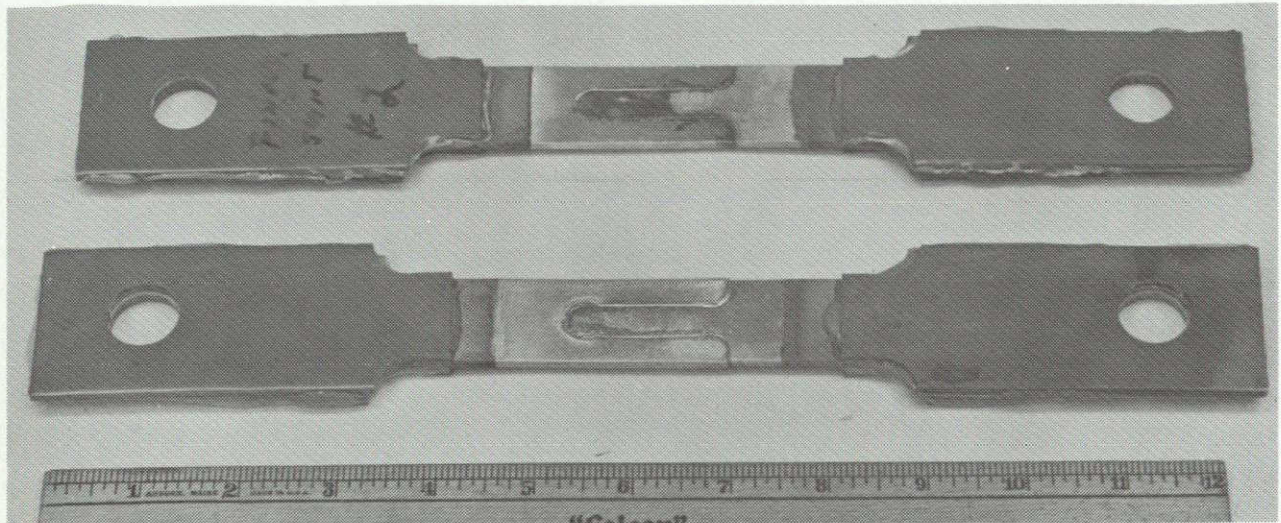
BRAZE JOINT SPECIMENS BEFORE TEST
